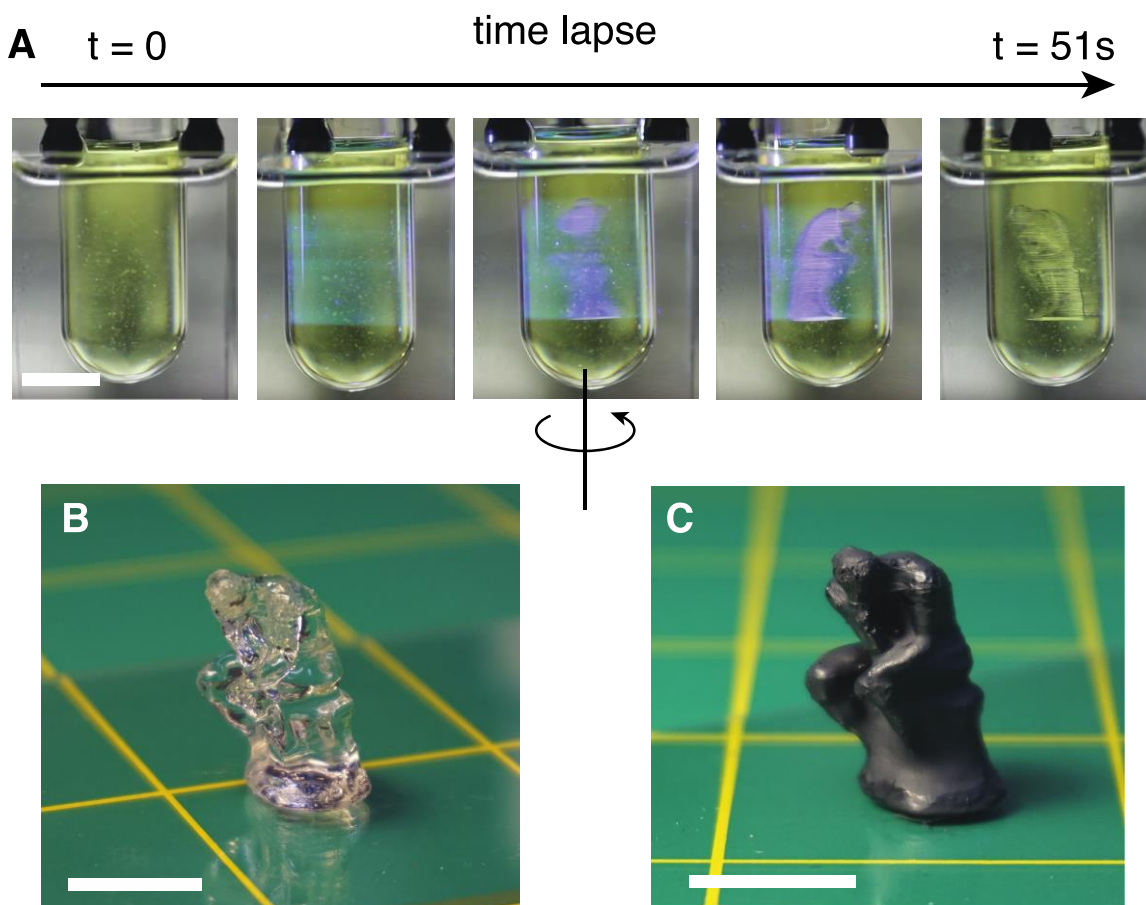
Print demonstration of “The Thinker” geometry. (A) A view into the print process. Material forms throughout the geometry together, rather than in layers. (B) The part shown in (A) after rinsing away uncured material. (C) The part from (B) painted for clarity. Scale bars: 1cm. Grid lines: 1 inch.
